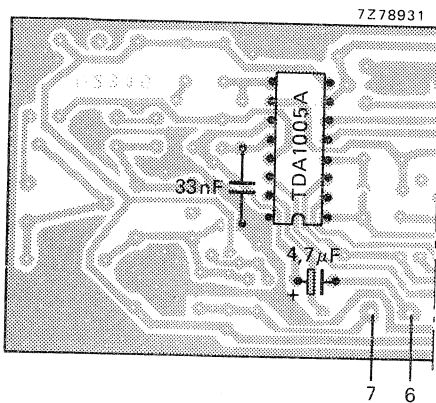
Printed-circuit board component side, showing component layout of Fig. 13.
